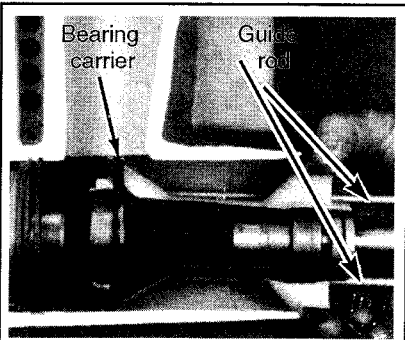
Using 2 thread-all rods as guides carefully insert the bearing housing ...
